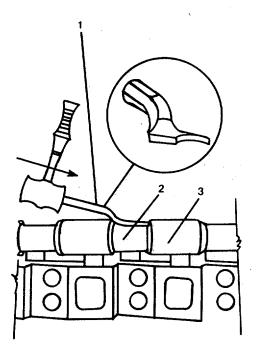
<u>Water Transfer Tube Positioning for Removal</u>
